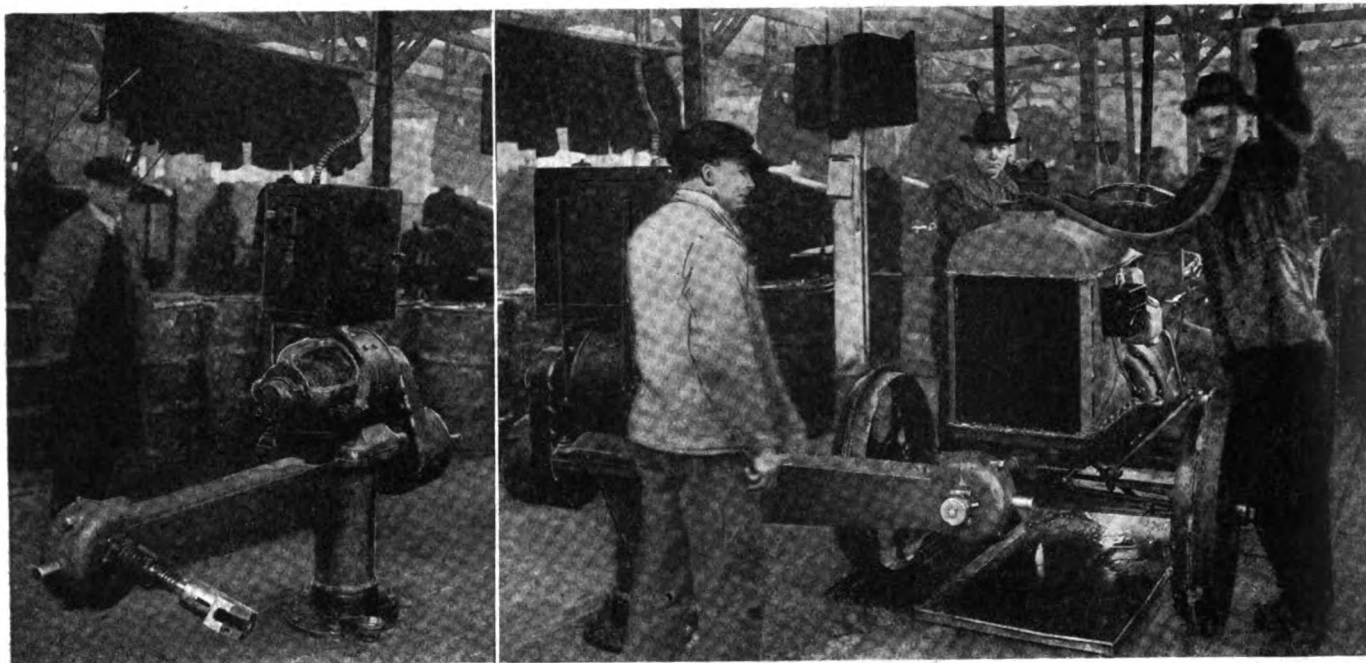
Left—Tractors at the end of the assembly row. Here they are ready to be started. At the left of the illustration is shown the machine for doing it. This is a swinging electrical cranking machine which fits over the starting crank handle. Fig. 23—Right—Electric cranker in position turning over engine while it is receiving water
